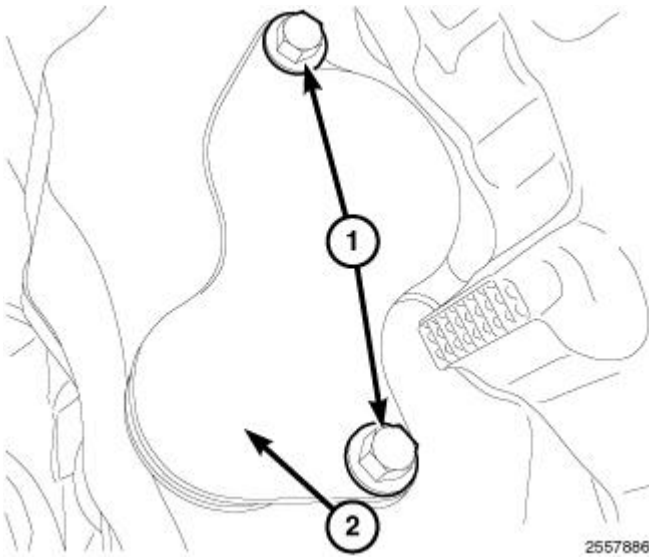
Identifying Bolts & Bell Housing Access Cover
